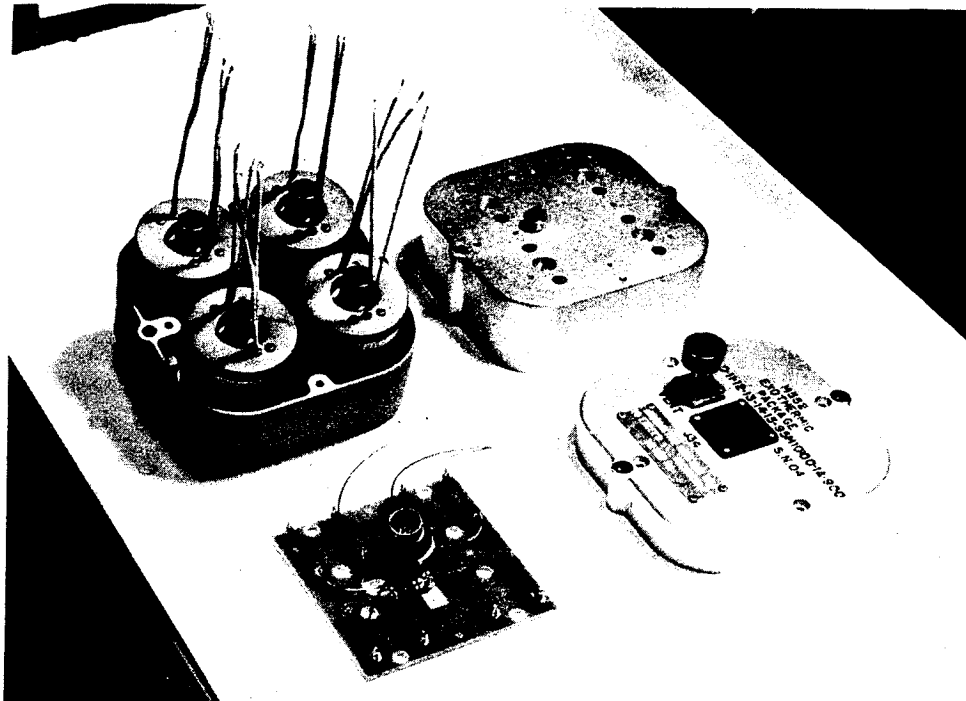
HOUSING ASSEMBLY AND CONTENTS
